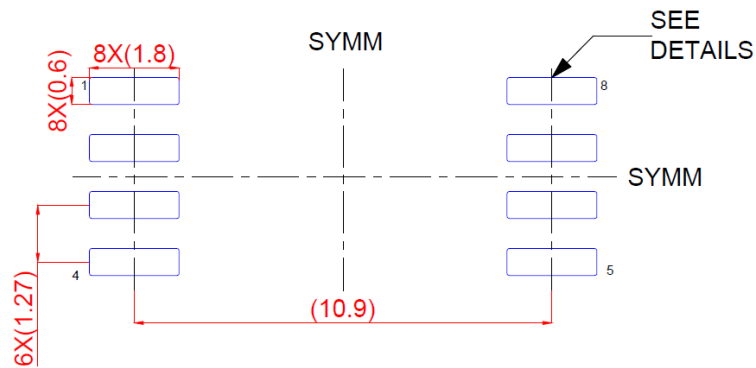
SOW8 Package Shape and Dimension in millimeters
